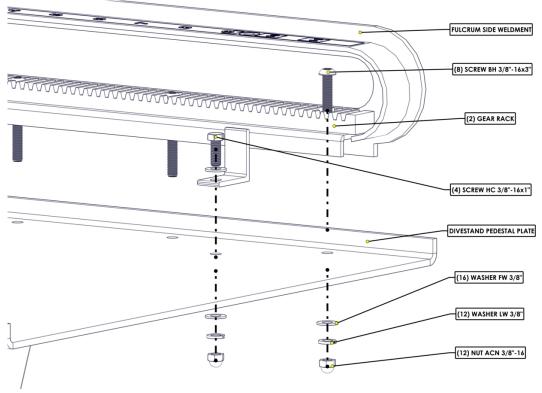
Figure F: Fulcrum Side Weldment & Gear Rack with associated hardware
